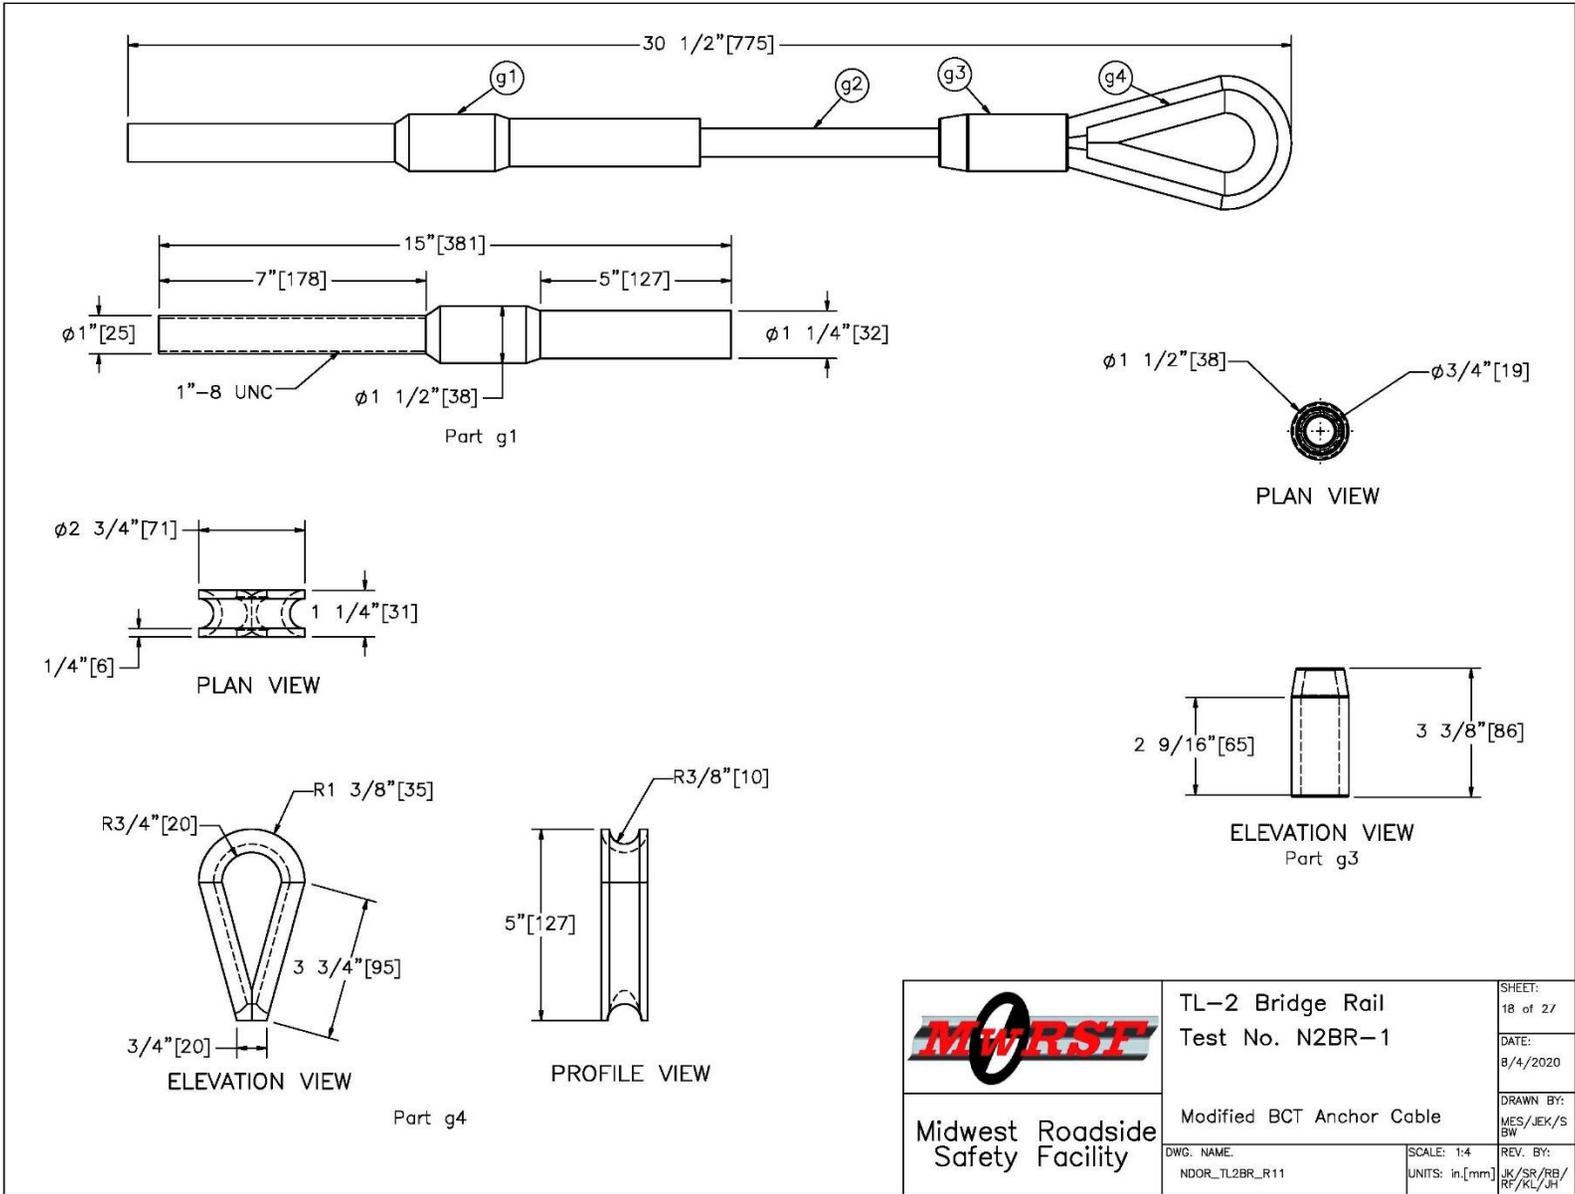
Modified BCT Anchor Cable, Test No. N2BR-1
